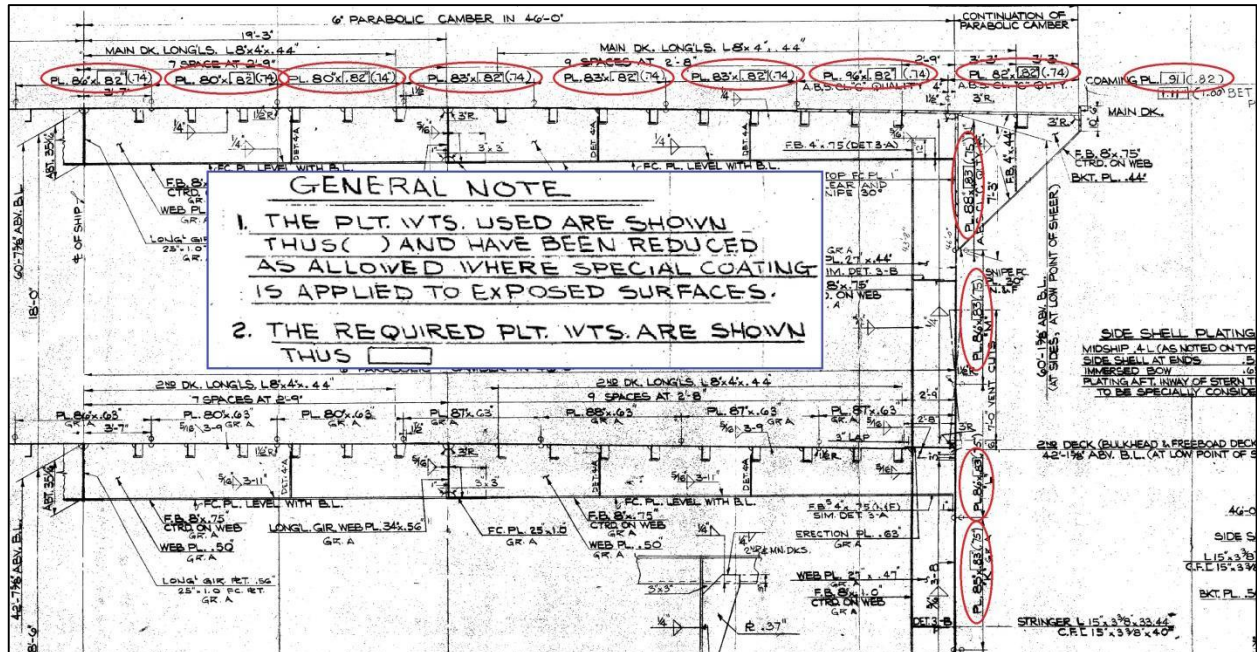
Reduced scantlings as permitted for strake plating with corrosion control coating (highlighted Midship Section Drawing [5]).
